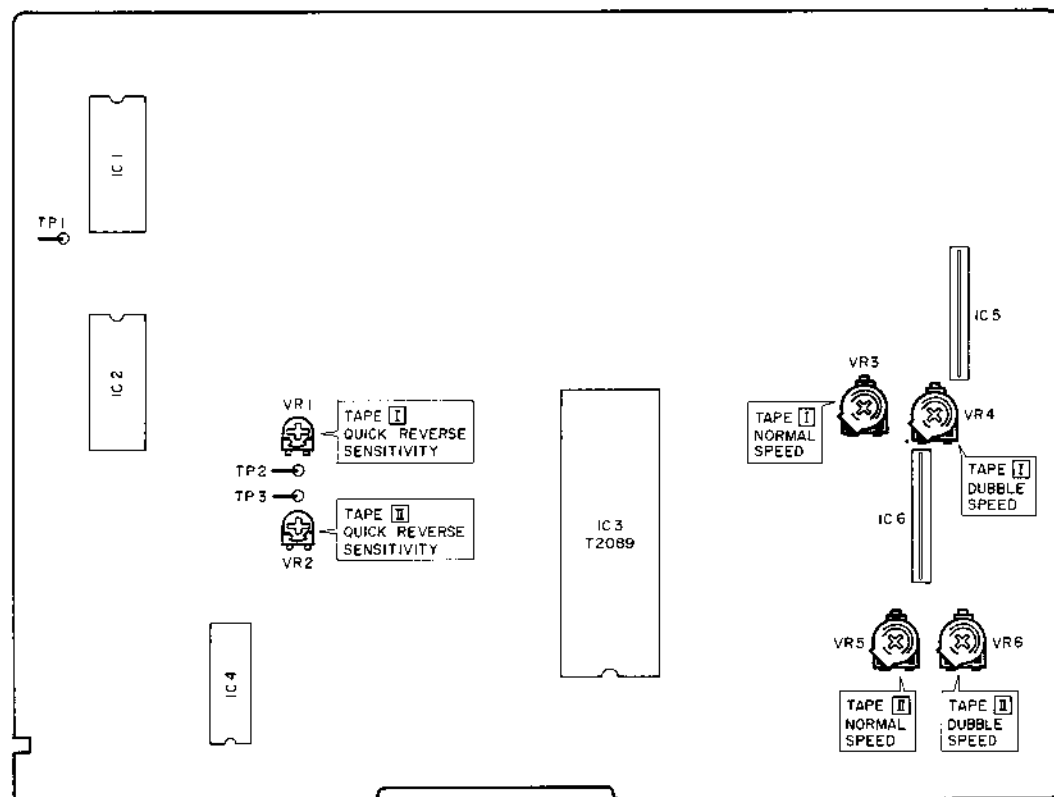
SYSCON PCB. ADJUSTMENT POINTS
